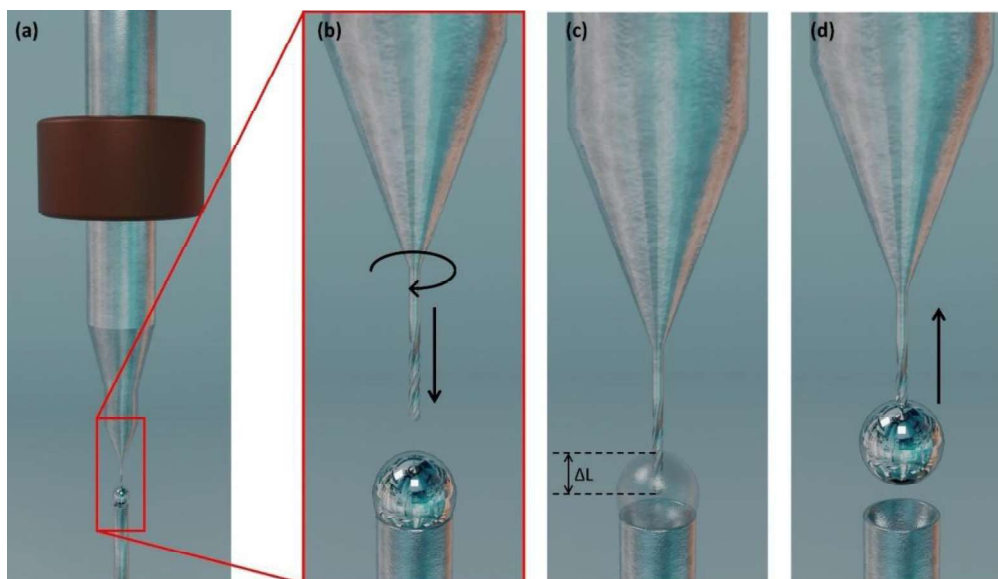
Step-by-step procedure for preparing electrical contacts in solder spheres using a modified 3D printer with a CNC milling head: (a,b) positioning of the drill bit above the solder sphere held on a support tube; (c) embedding the drill bit halfway into the sphere (ΔL) under controlled spindle speed and feed rate; (d) retraction of the milling head and detachment of the drill bit.
